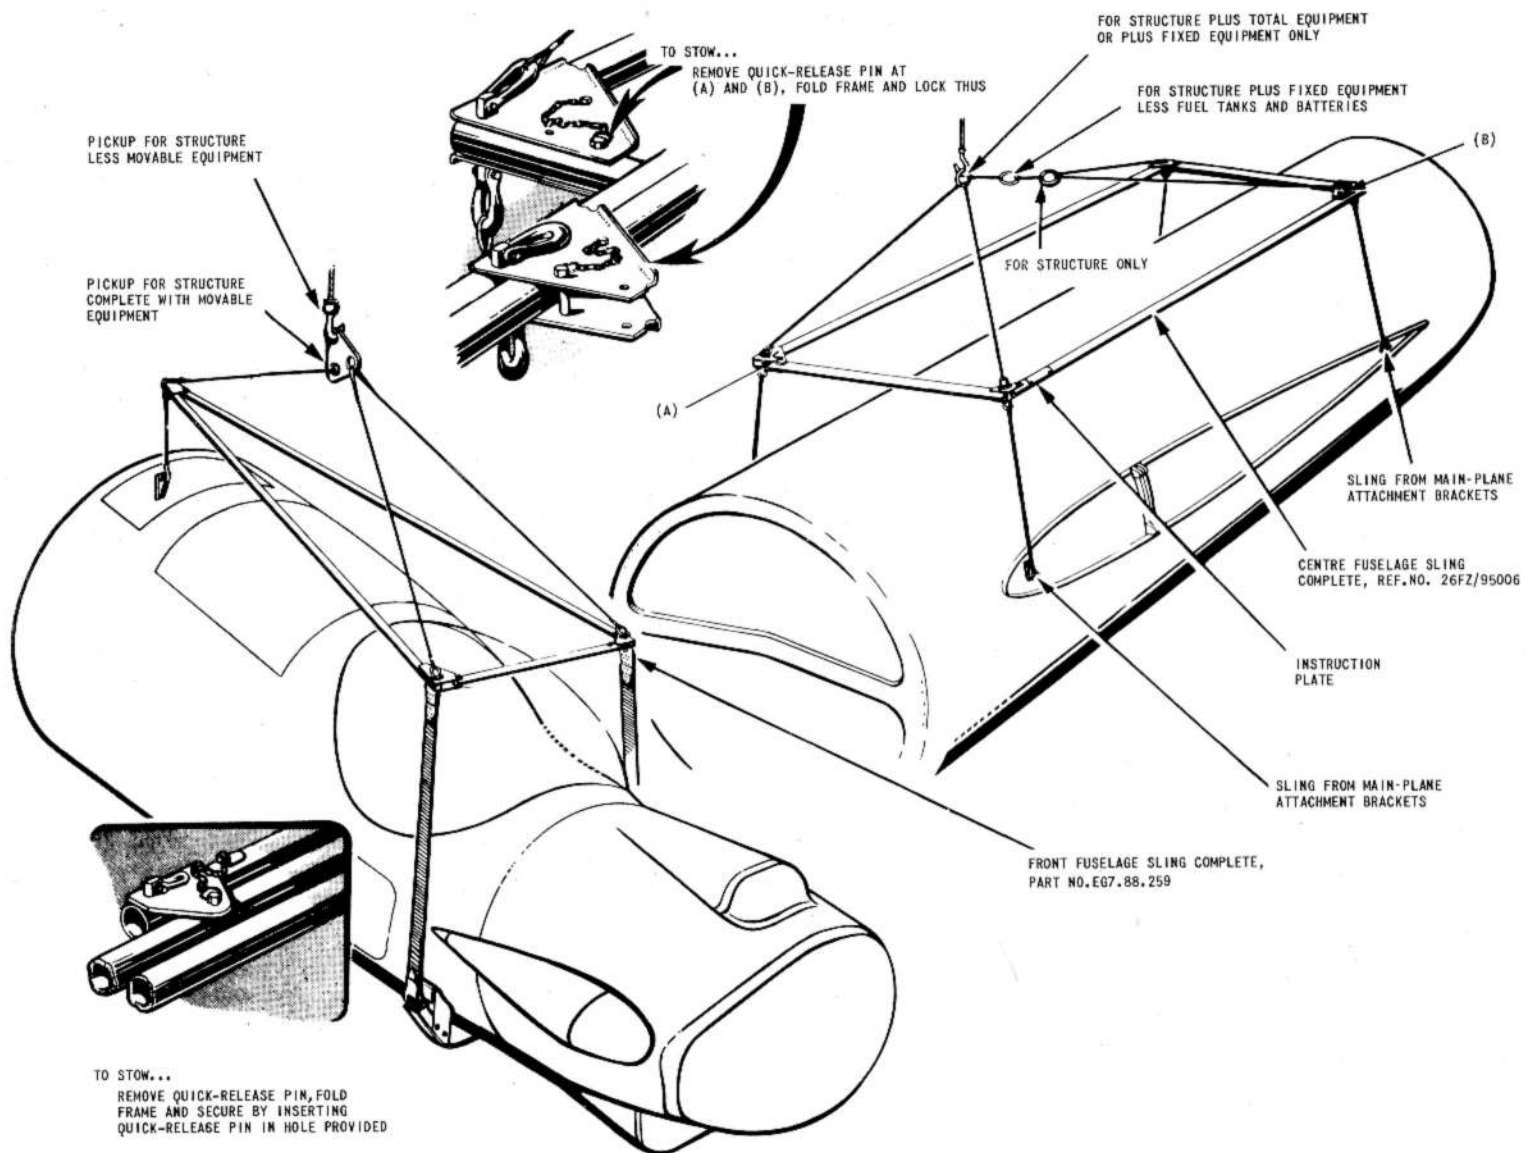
SLINGING-FRONT AND CENTRE FUSELAGE
